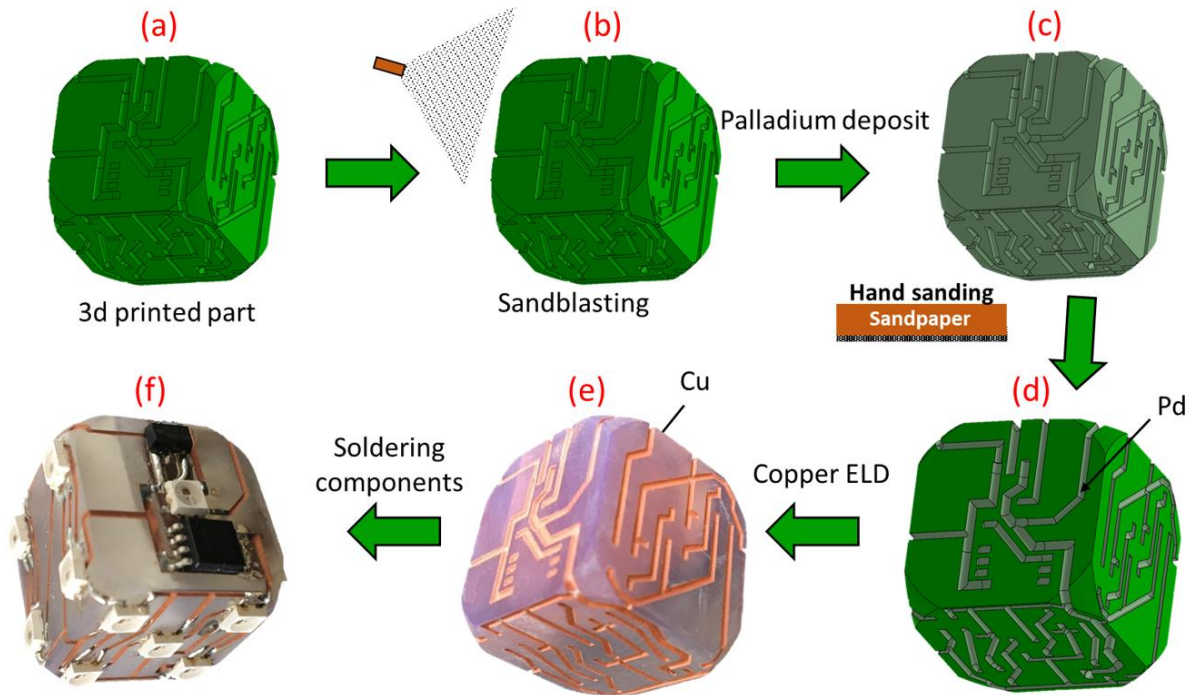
Process steps (a) 3D part with grooves printed using SLA technique. (b) Surface physical modification by sandblasting. (c) Colloidal Palladium deposit on the entire surface. (d) Colloidal Palladium localized only into the grooves after hand-sanding. (e) Electroless Cu plating. (f) final prototype.
